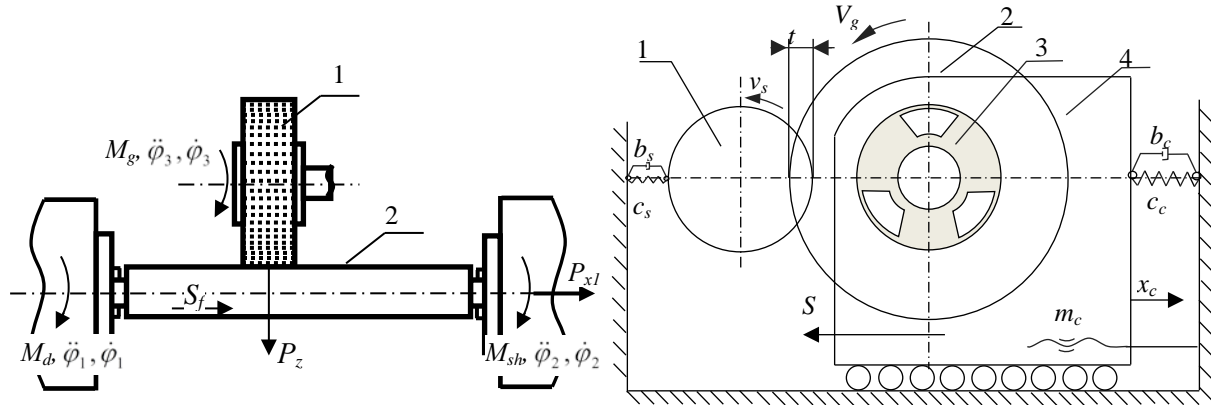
Kinematic scheme of circular external grinding: 1– grinding wheel; 2 – processed shaft. Figure 2. Circular grinding machine: 1– processed shaft; 2 – grinding wheel; 3 – grinding head; 4 – grinding machine bed.
